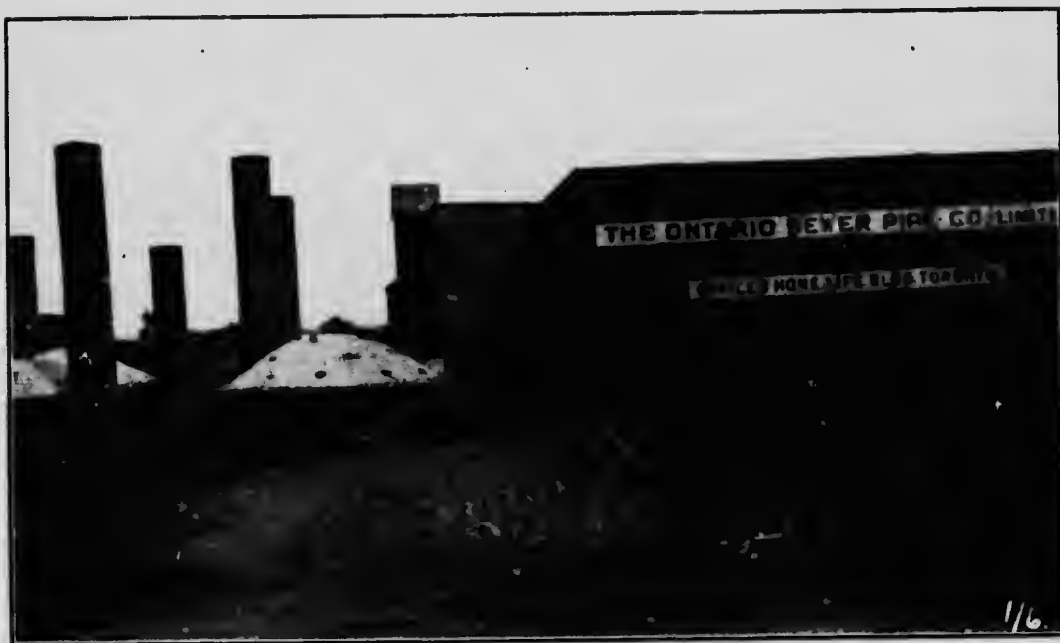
Ontario Sewer Pipe Co's plant, Mimico, showing down-draft kilns used for sewer pipe.
